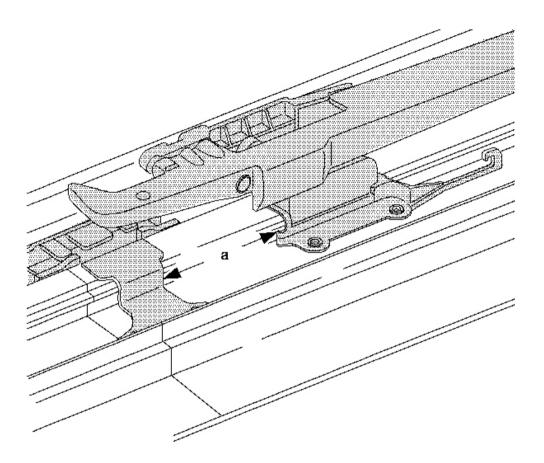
Installing Sunroof Motor Courtesy of GENERAL MOTORS CORP.
